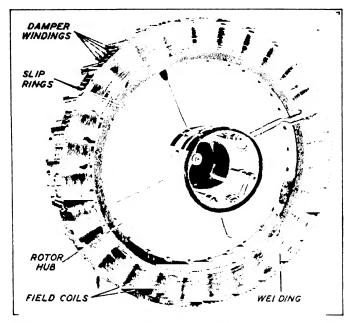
A Rotor Built up by Welding Steel Plates and Angles. The Poles are Fastened to the Rotor by use of Dovetail Slowers.
